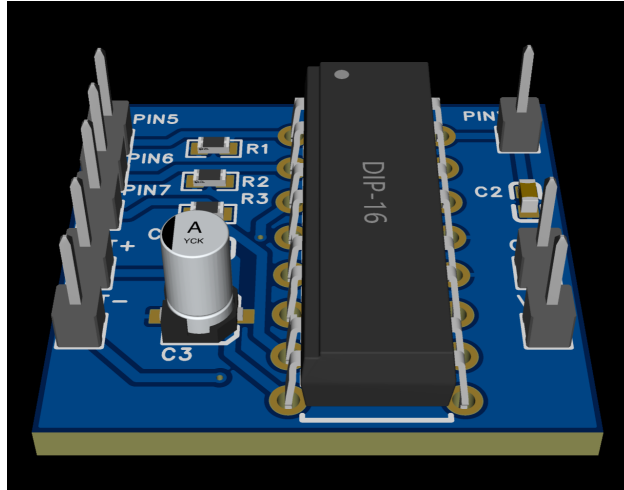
Three-dimensional rendering of the assembled motor driver PCB.
